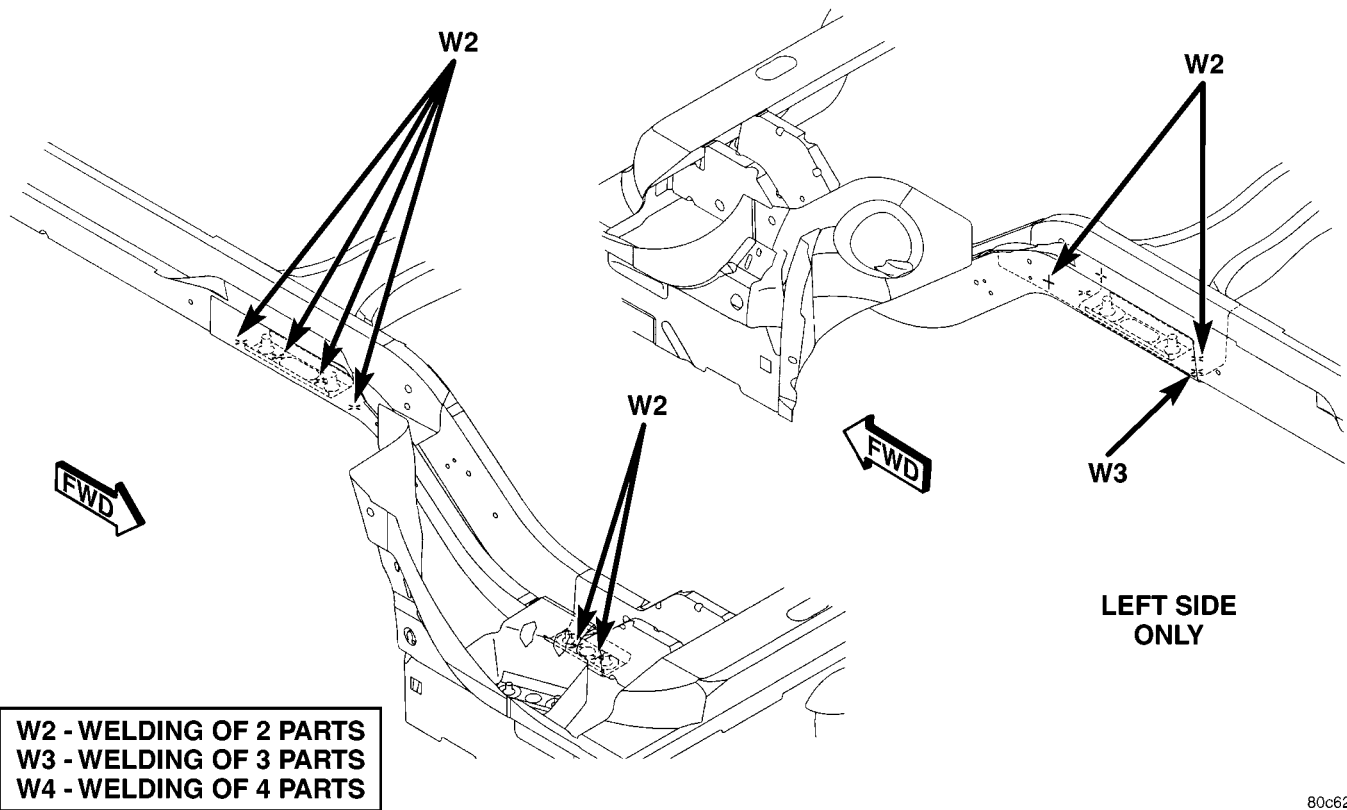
CENTER FLOOR REAR SUSPENSION CROSSMEMBER TO CENTER SIDE RAIL EXTENSION TO REAR SIDE RAIL
